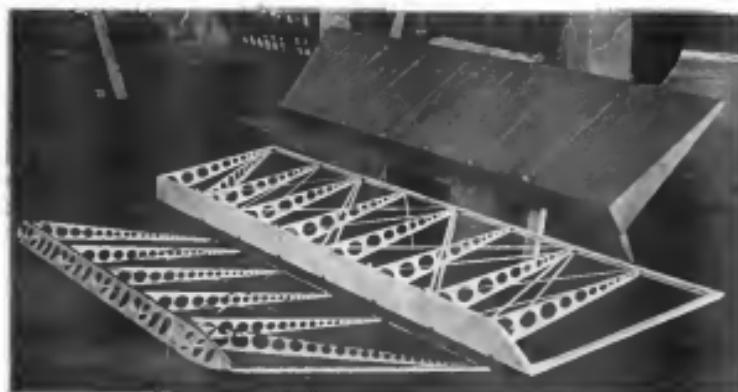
STEEL CONSTRUCTION OF WING AND RUDDER STRUTS.
